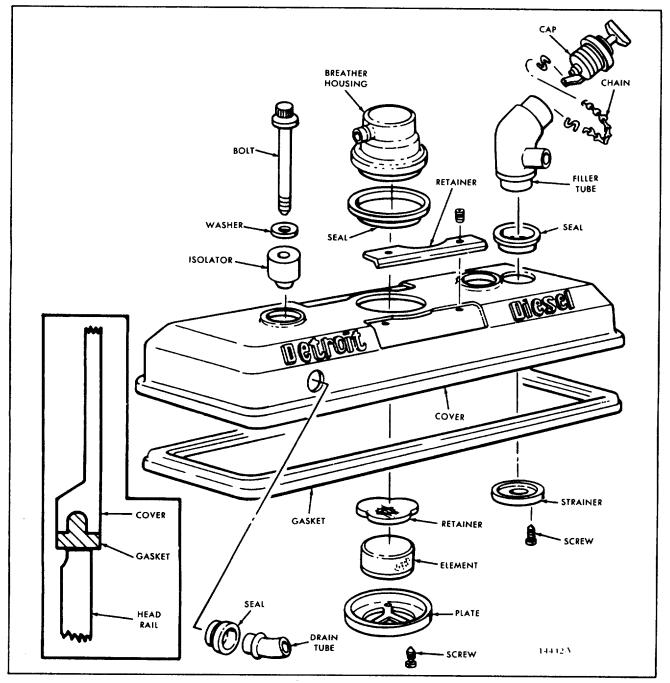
Typical Valve Rocker Cover Assembly (Current)
